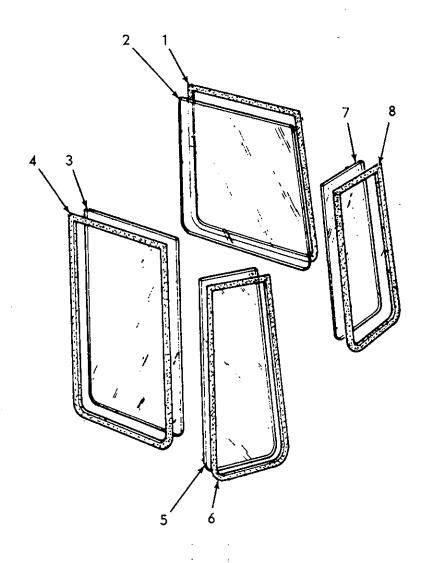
RIGHT SIDE DOOR ASSEMBLY
